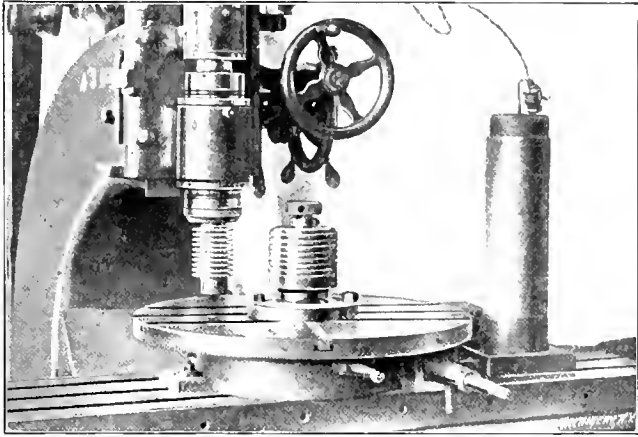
Cutting out Piston Rings in the Vertical Milling Machine
